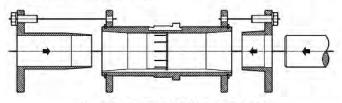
Short Shaft Bushing and Output Hub Assembly
